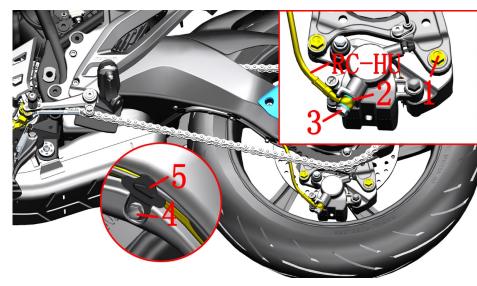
FRONT FORK COMPONENT		Single rocker ABS brake system A-4	СНК
